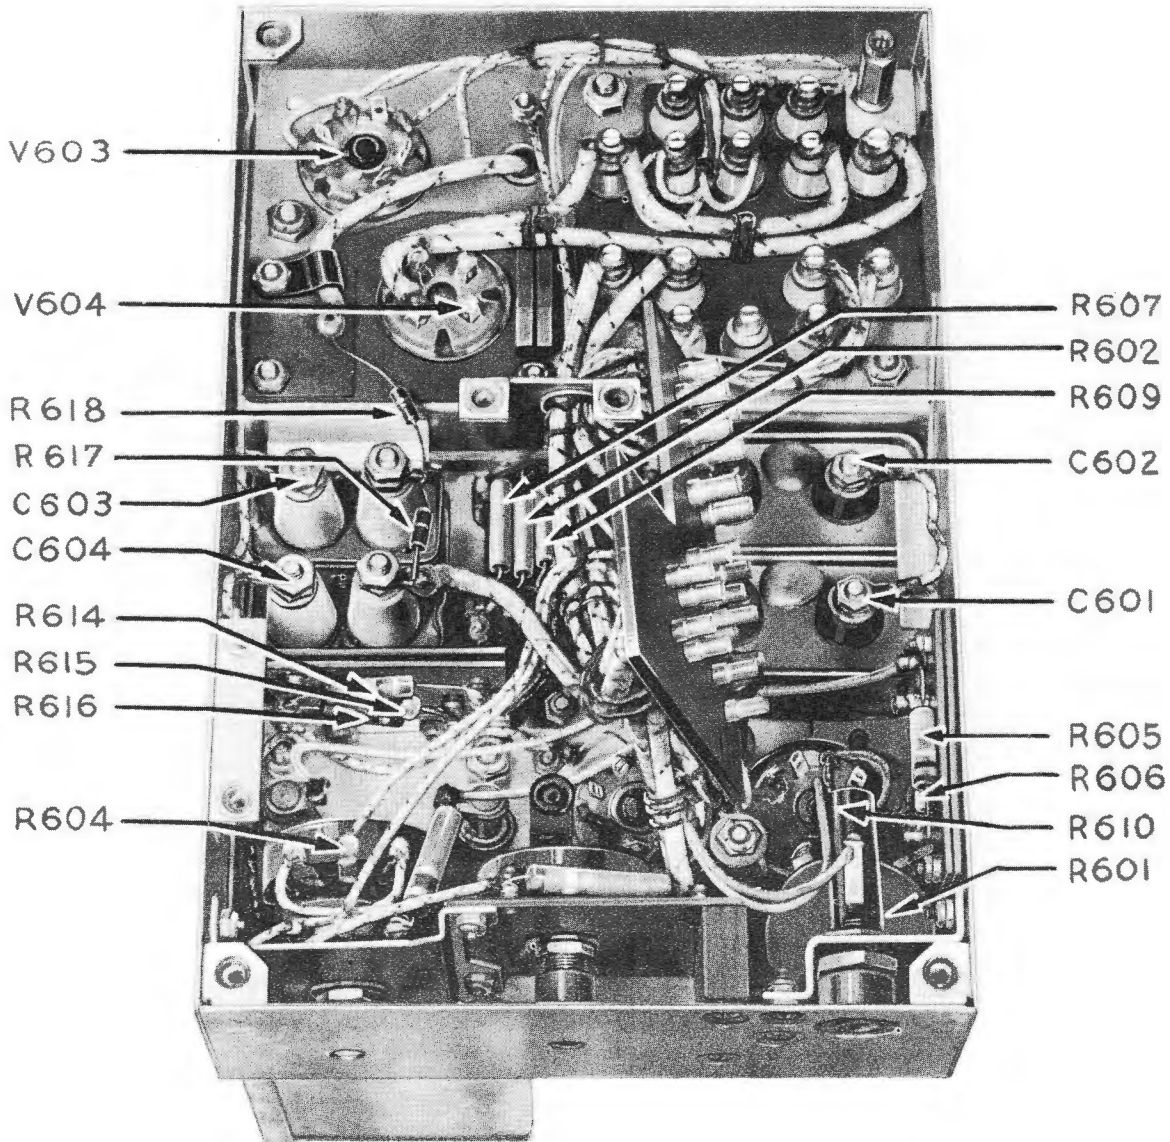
Power Supply—Bottom Terminal Board Loose
